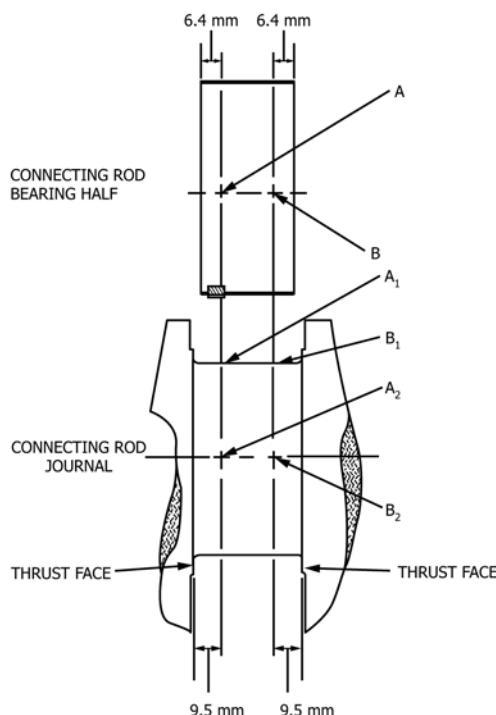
Clearance Measuring Points for Connecting Rod Bearings
